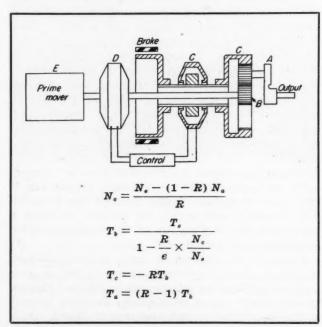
Differential drive in which power divides between a straight mechanical path to the sun gear B, and a branch through a torque converter D-C
